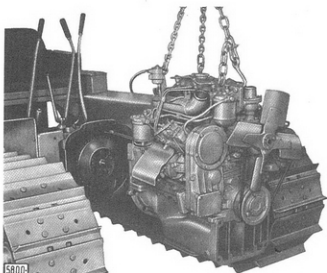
Removing (or Refitting) the Power Unit using Lifting Chain Part No. 290740 (455 C - 505 C)
